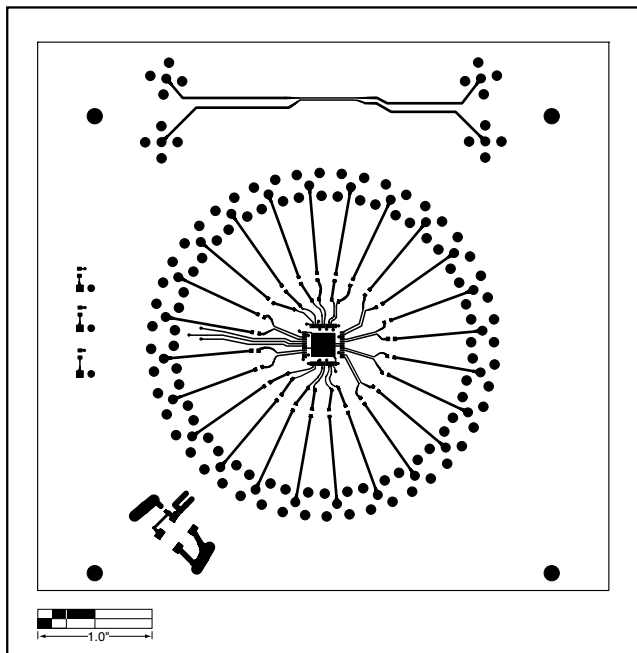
MAX3781 EV Kit PC Board Layout—Component Side
